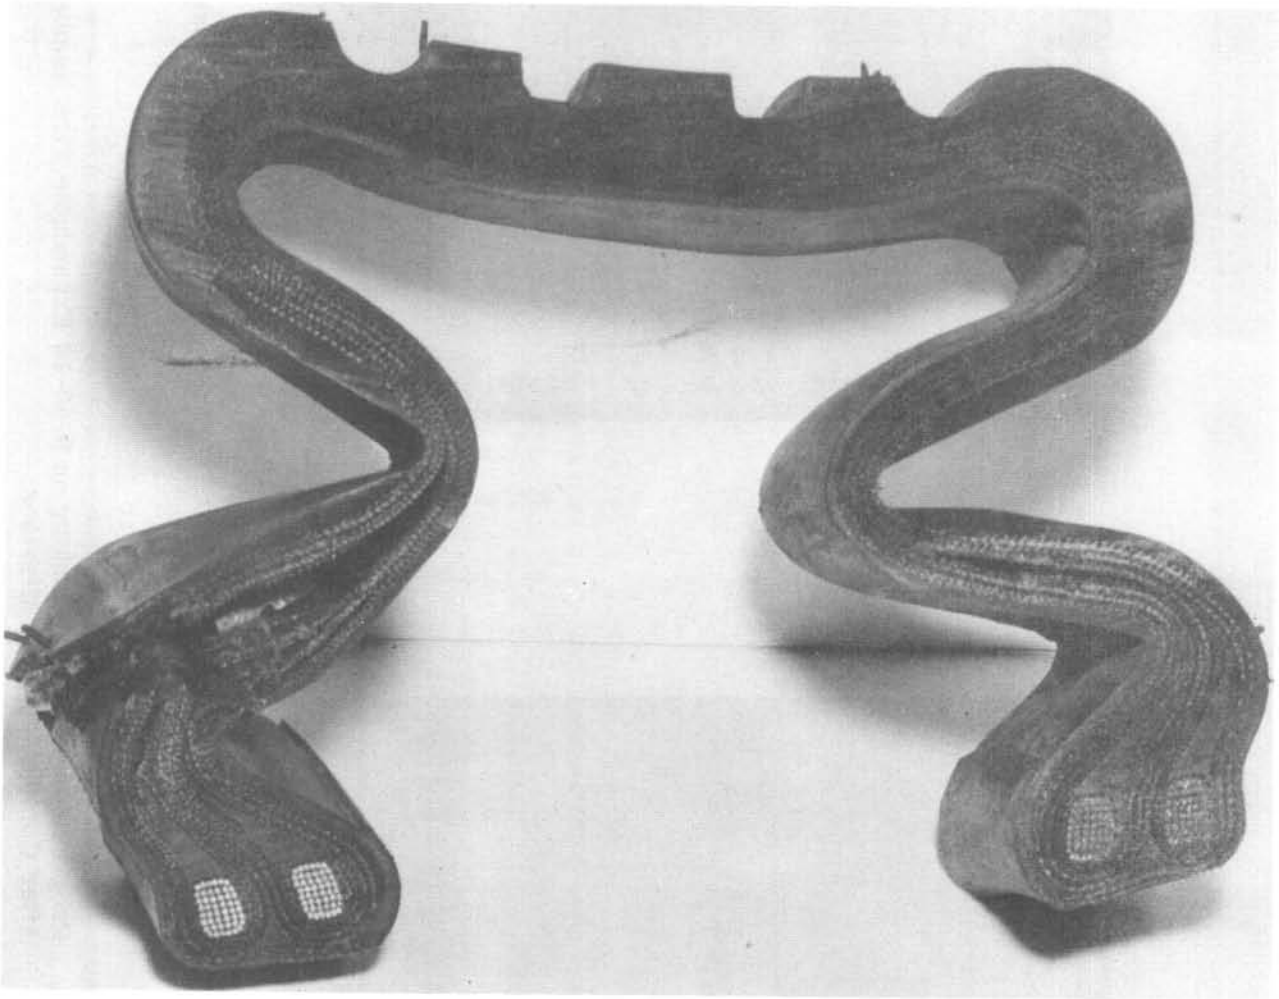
Section of 9.50-16 Expandable Tire Number 5 Taken Through Failed Sidewall
